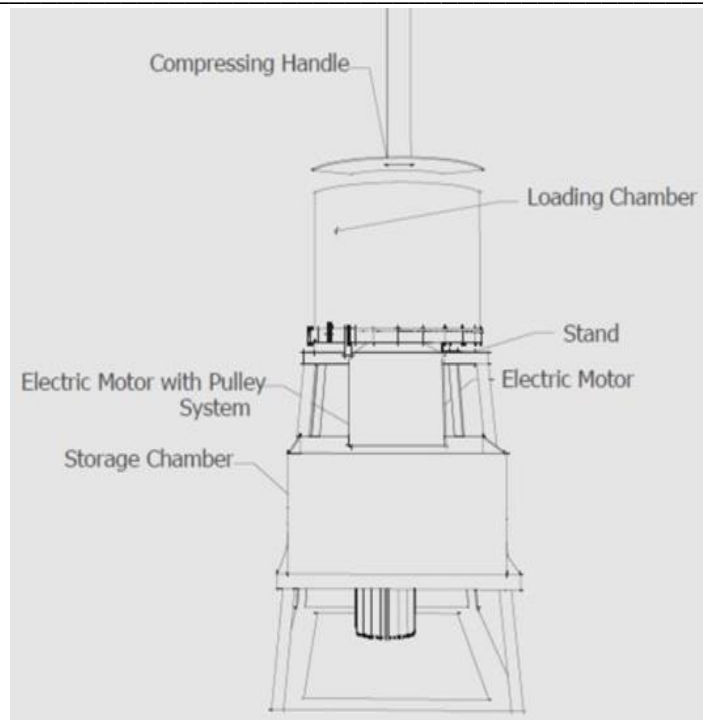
Front View of the Improved Continuous Plantain Slicing Machine
